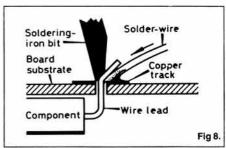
Soldering a component lead to a PCB pad. The iron tip heats the lead and pad directly (Electronics Australia).
